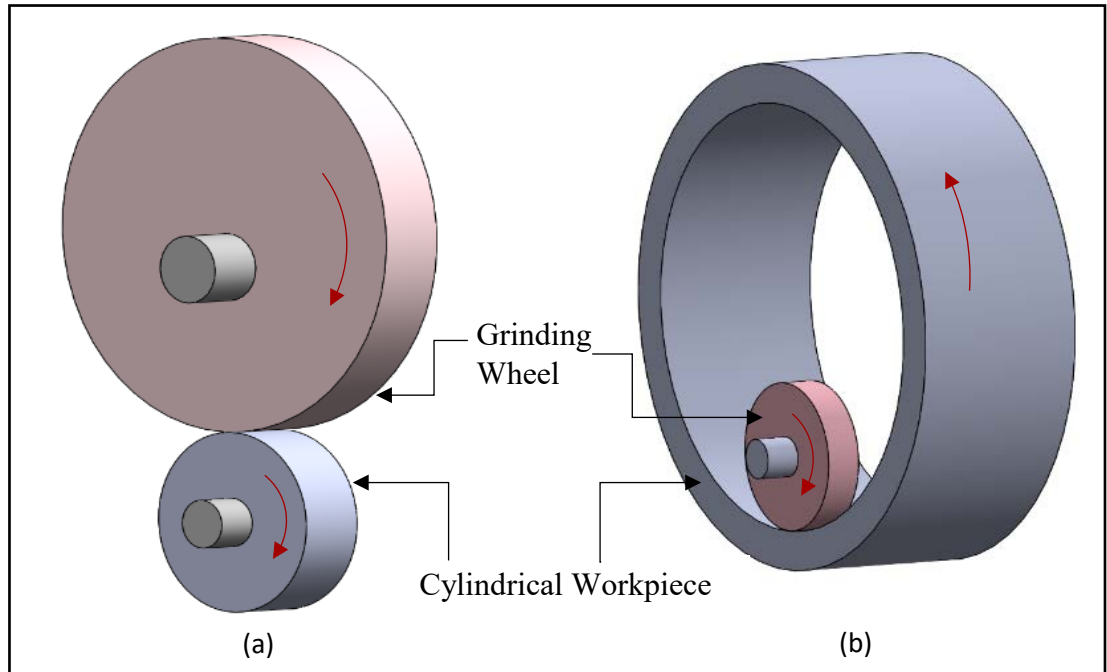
(a) External Cylindrical Grinding and (b) Internal Cylindrical Grinding
